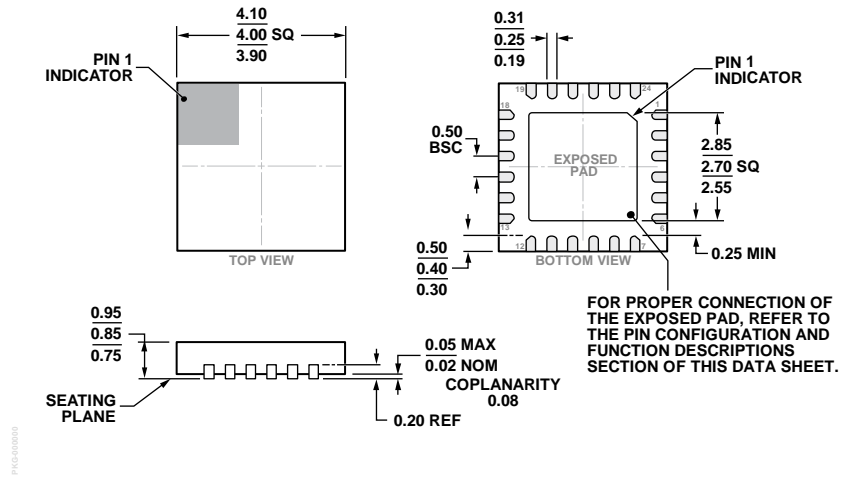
24-Lead Lead Frame Chip Scale Package [LFCSP_VQ]
